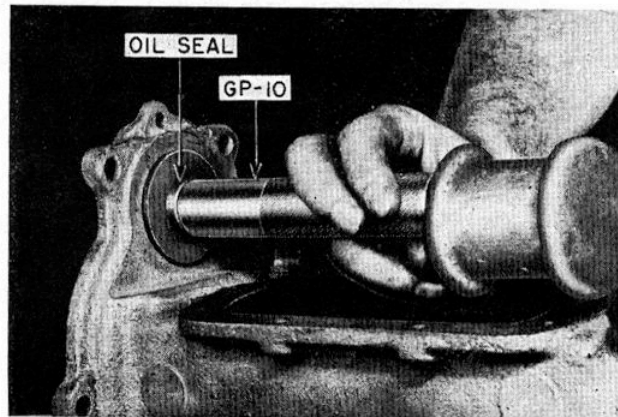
INSTALLING MAGNETO SHAFT OIL SEAL
